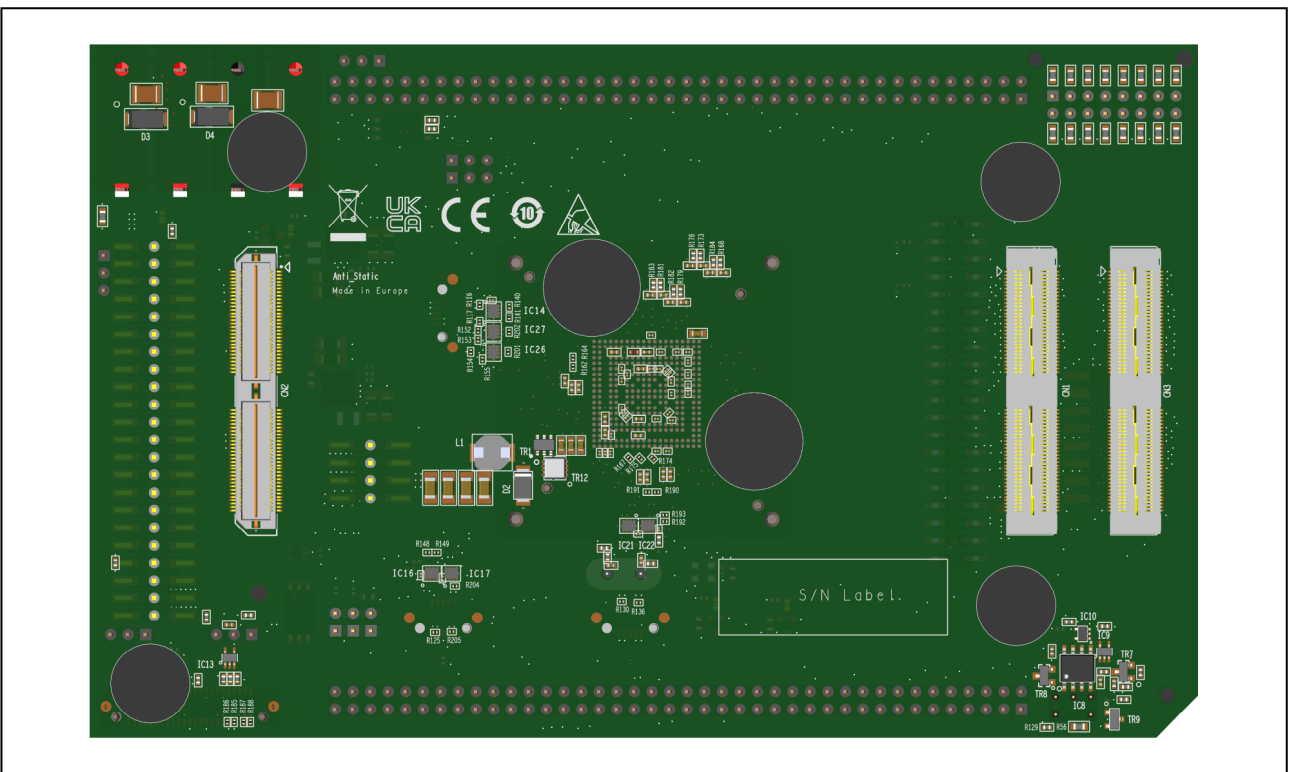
D018567_06_V02 Piggyback board bottom view
